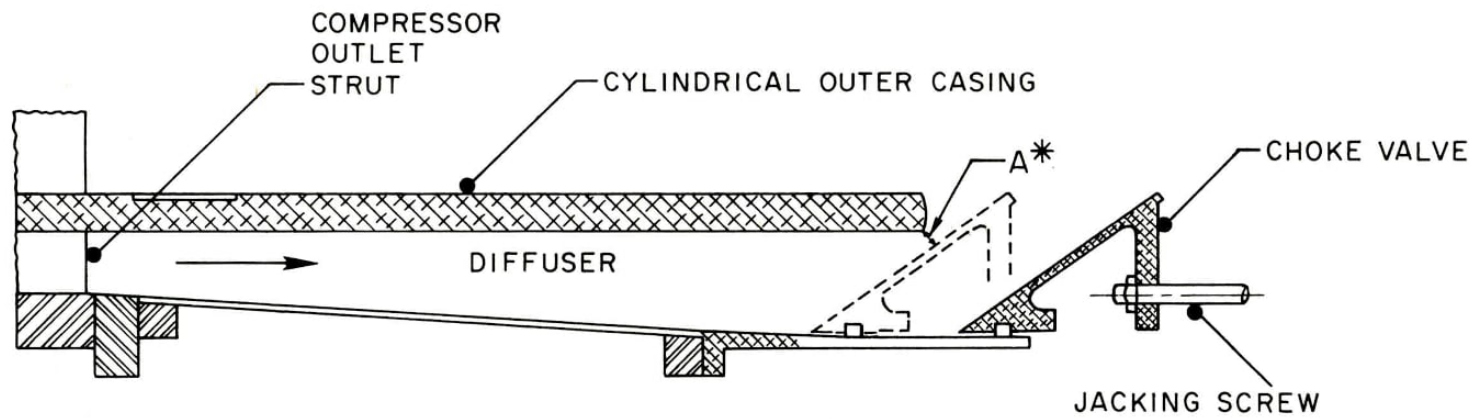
TEST COMPRESSOR OUTLET THROTTLE VALVE
